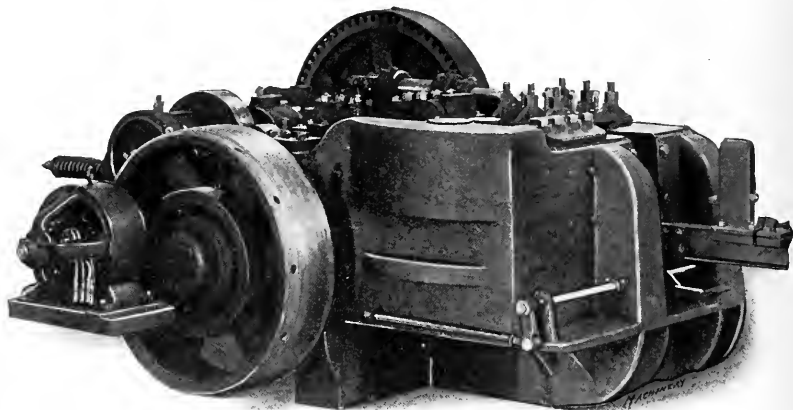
"National" Four-inch Heavy-pattern Forging Machine with Direct Motor Drive, the Motor being geared directly to the Friction Slip Flywheel
